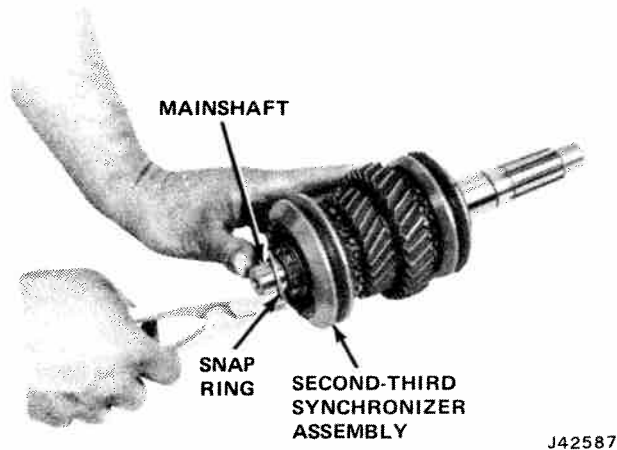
Second-Third Clutch Hub Snap Ring Removal and Installation
